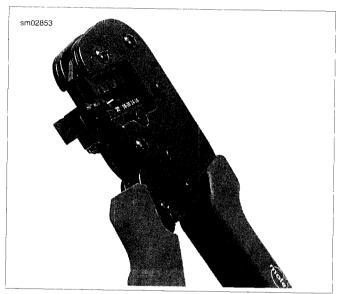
Open Electrical Crimp Tool (HD-48119) at 45 Degrees
